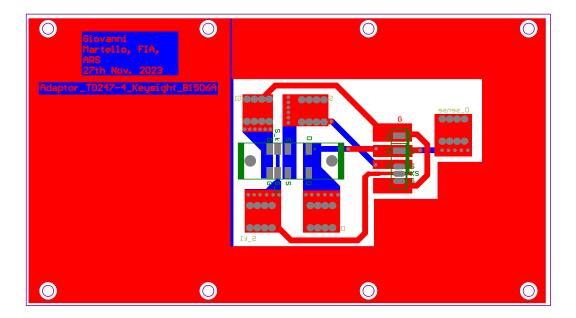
PCB board of adaptor, here is highlighted the top layer.
